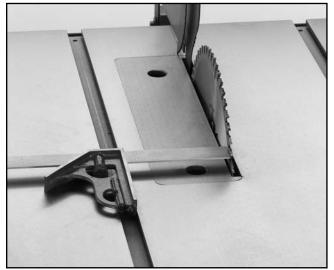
Adjusting blade to miter slot after rotating blade 180° and sliding square down miter slot.
